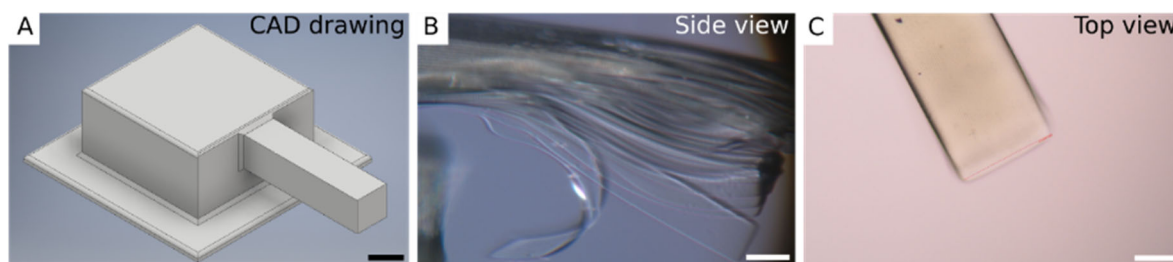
| A) CAD drawing of an unsupported beam with one free end is designed. B) Micrograph of the beam after printing seen in sideview. The unsupported beam reveals a layered appearance where each print layer is a sheet of a well-defined PEGDA. However, adherence to the next layer is not achieved as the previous layer is not held in place but can float freely making the penetration depth insufficient to ensure gelation between the two layers. The layers get more attached with increasing print height as movement of subsequent layers is restricted by the previous layers resulting in more attachment between the final layers. C) Due to better attachment through the print, the top view does not necessarily reveal the missing attachment between layers. Scale bar black: 500 μm , scale bars white: 200 μm .
